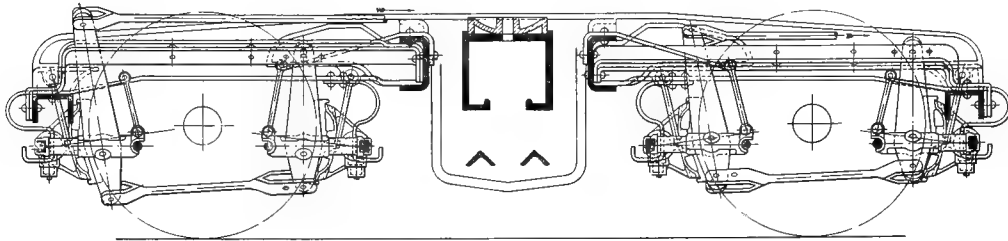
Diamond Special Brake Beam Clasp Brake Arrangement for Four-Wheel Trucks. Chicago Railway Equipment Company.
